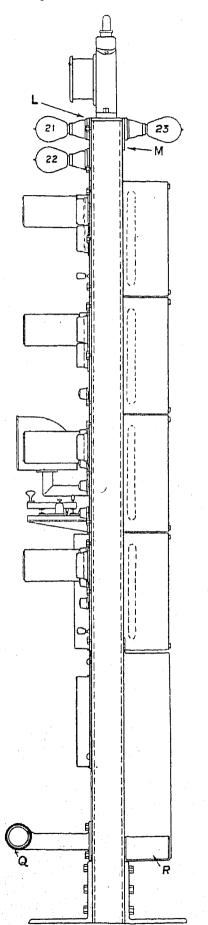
Side elevation of standard panel-mounted equipment.
